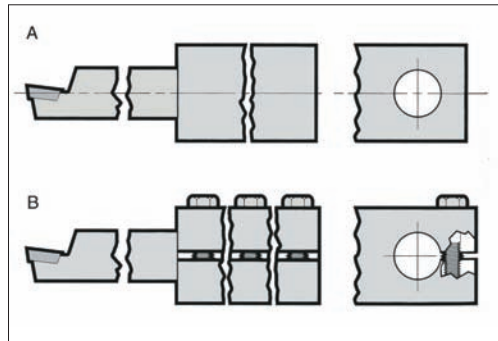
Two styles of toolholders that are best for holding boring bars: a rigid, or flange-mounted, bar (A) and a divided block that clamps the tool when tightened (B).
